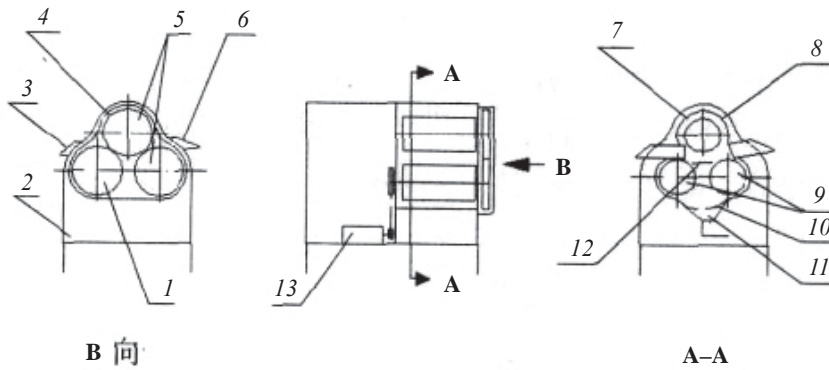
Structure of a 3-roller sugarcane juicer in the market: 1 — drive wheel; 2 — machine frame; 3 — bagasse outlet; 4 — gear shield; 5 — driven wheel gear; 6 — sugarcane inlet; 7 — upper squeezing roller; 8 — squeezing shield; 9 — lower squeezing roller; 10 — filter screen; 11 — juice outlet; 12 — sheet support; 13 — motor
